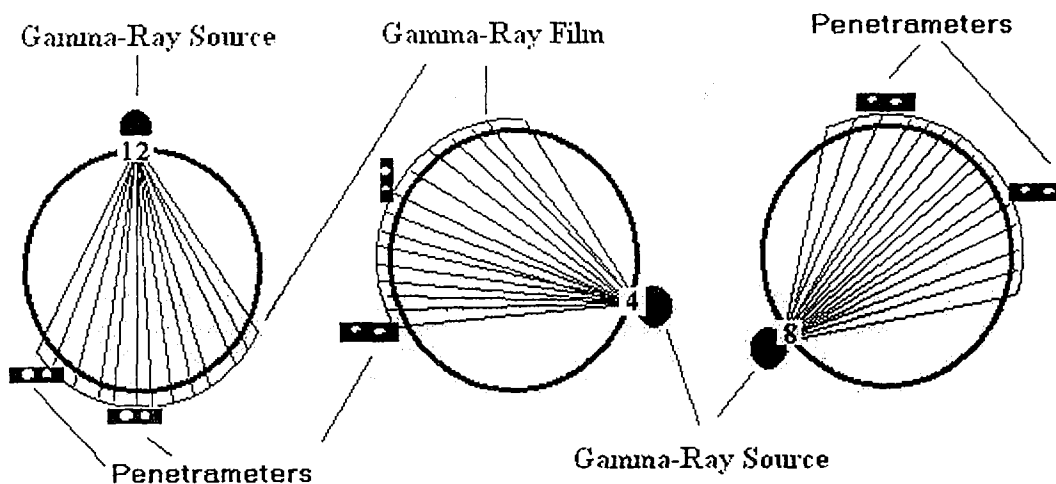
The three stages of polar radiography for one weld joint.
